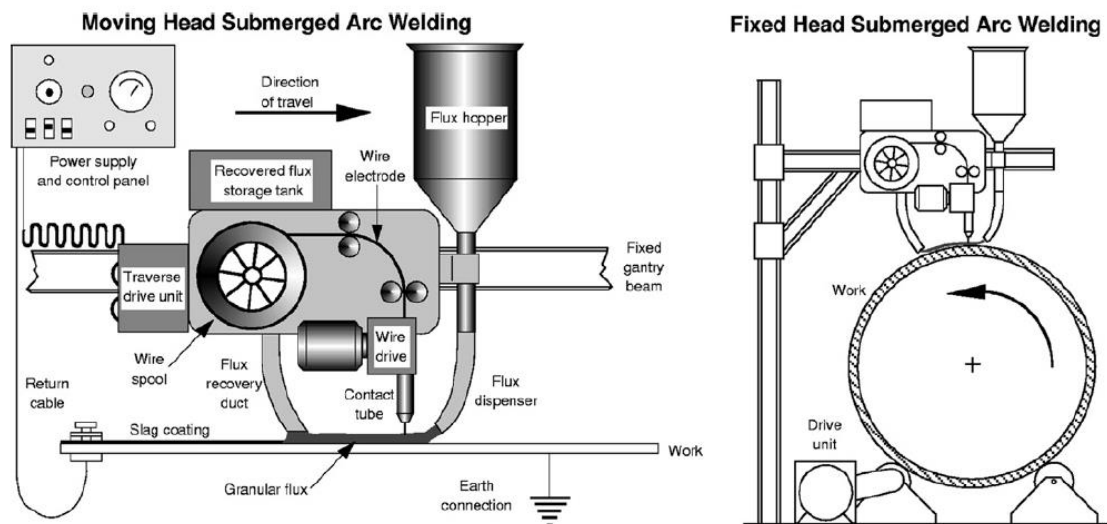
Submerged Arc Welding Equipment (Swift & Booker, 2013).
